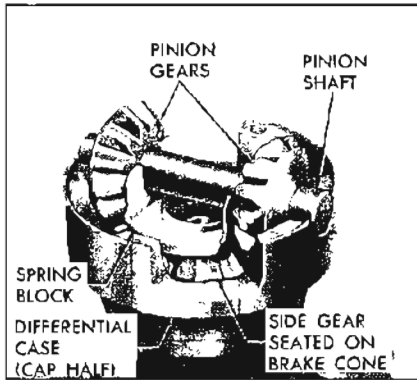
Installing Parts Into Cap Half of Differential Case
